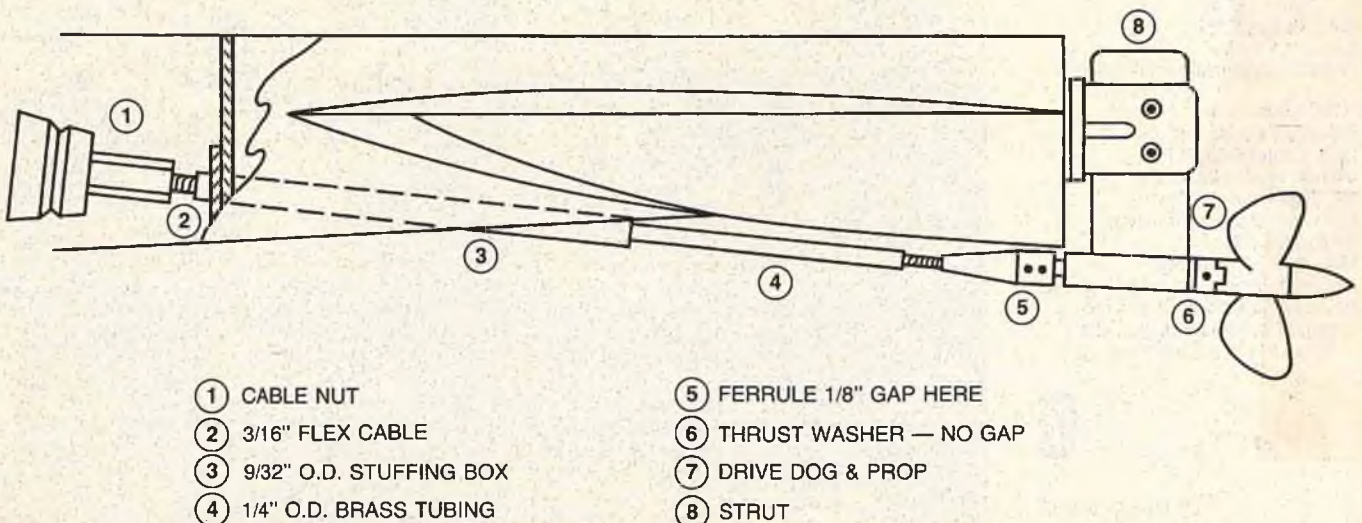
B: HYDRO DRIVE LINE ASSEMBLY DETAILS
